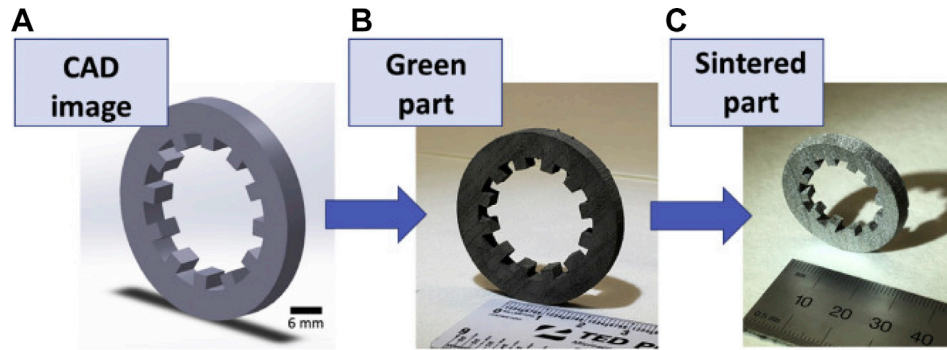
Chemnitz University of Technology's stator for a winding-less reluctance machine produced by extrusion technique showing the CAD design, printed green part, and postheat-treated product. (courtesy: J. Rudolph) [137]. (For interpretation of the references to color in this figure legend, the reader is referred to the Web version of this article.). CAD, computer-aided design.
